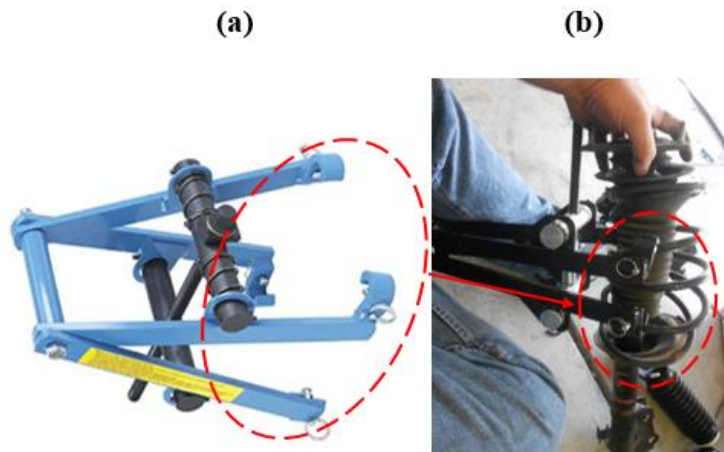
(a) OTC spring compressor. (b) Fitted with a coil spring
